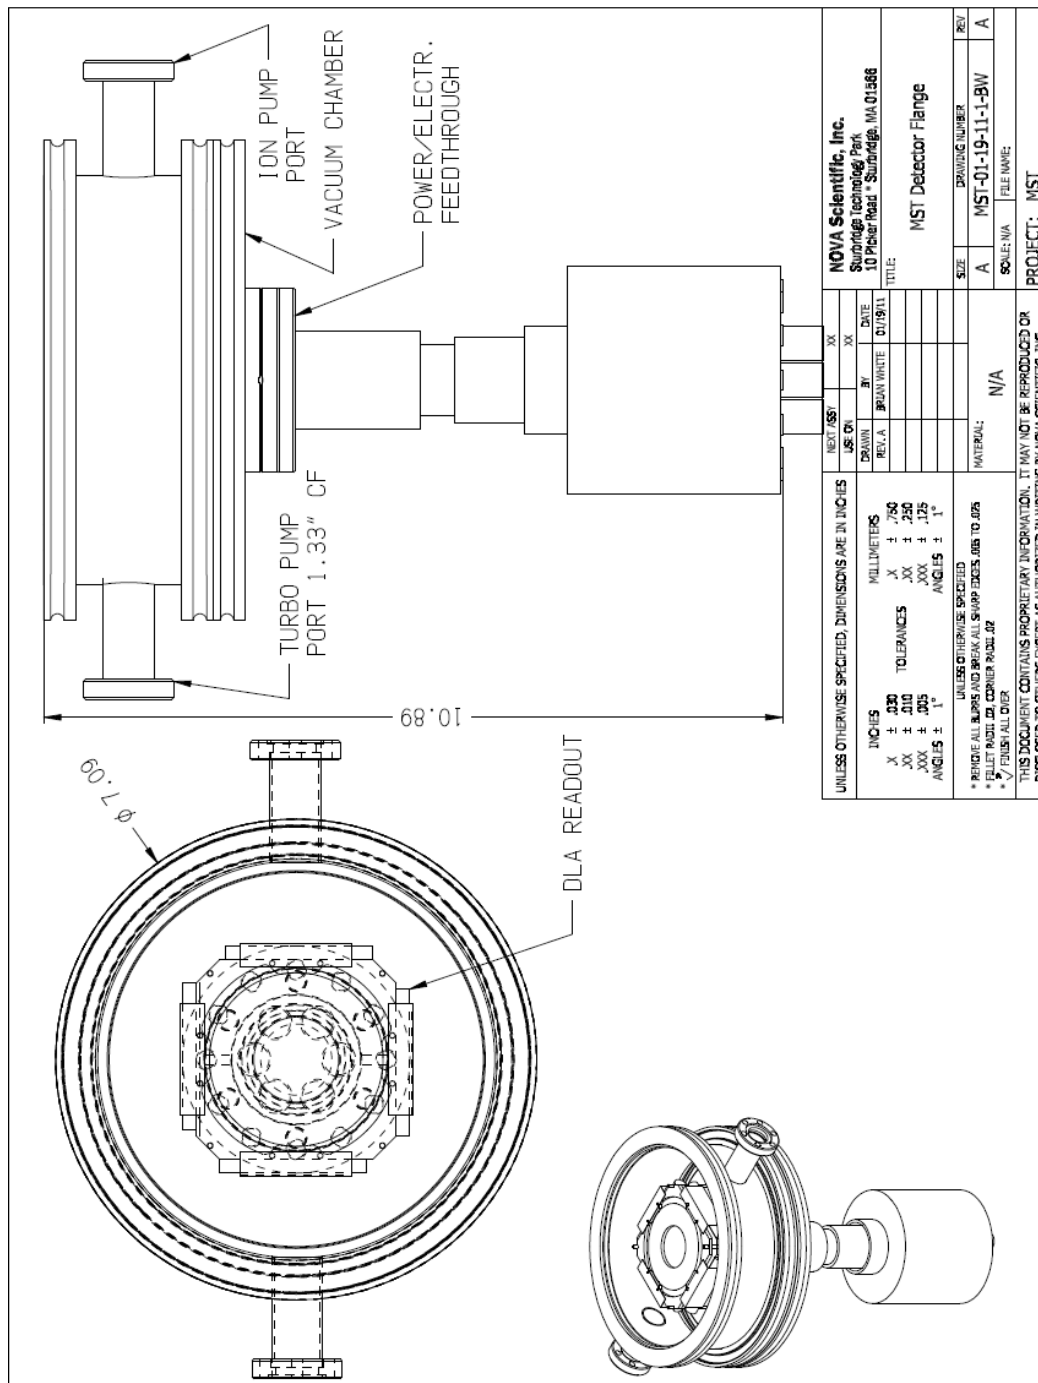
Drawing of MCP Base Neutron Detector Flange
